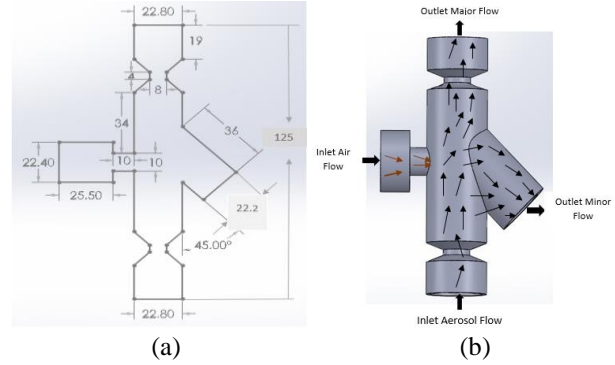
(a) A cross sectional and (b) 3D view of the designed minor flow channel based virtual impactor with dimensions.
